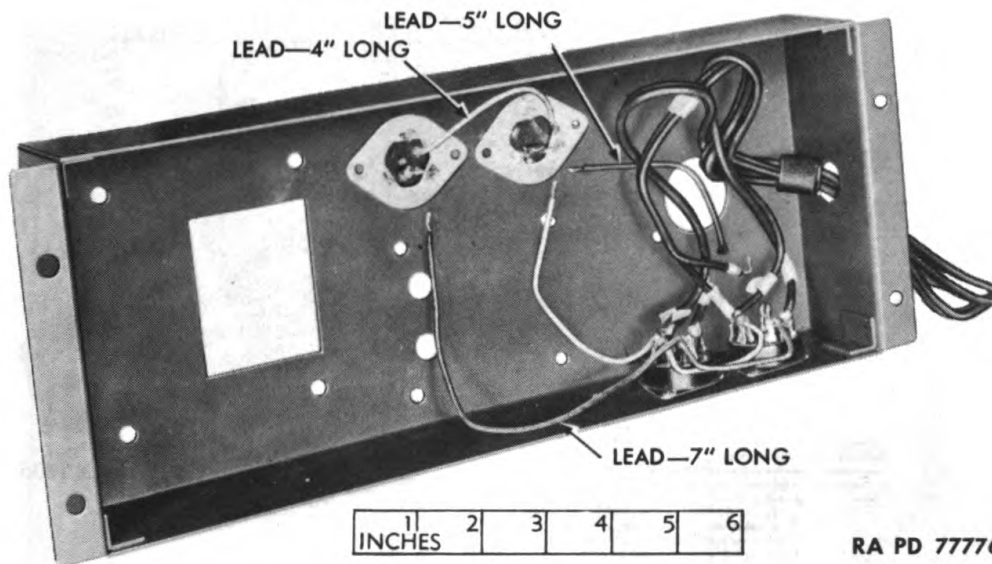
Removal of Connecting Leads From Power Supply Chassis
